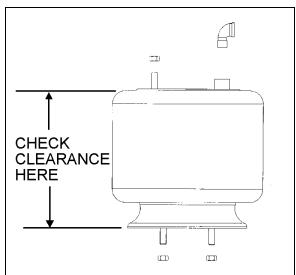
TYPICAL AIR SPRING CLEARANCE
